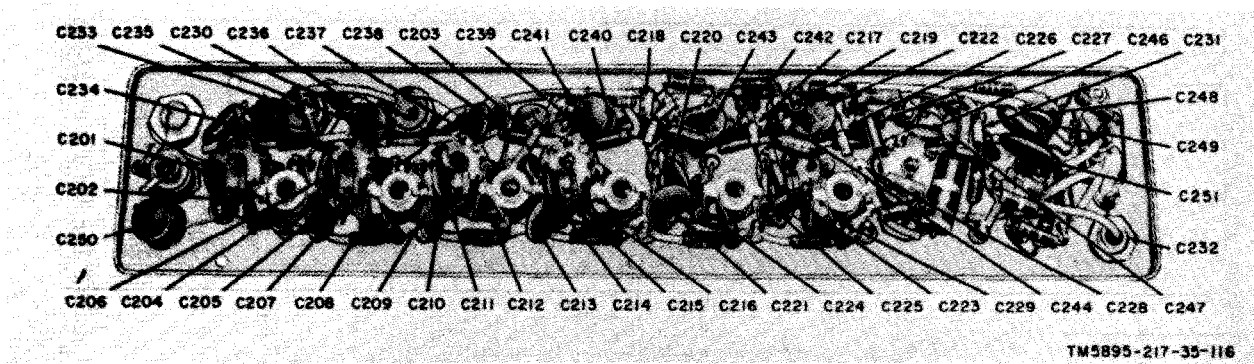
IF suppressor subchassis, bottom view, capacitor location.
